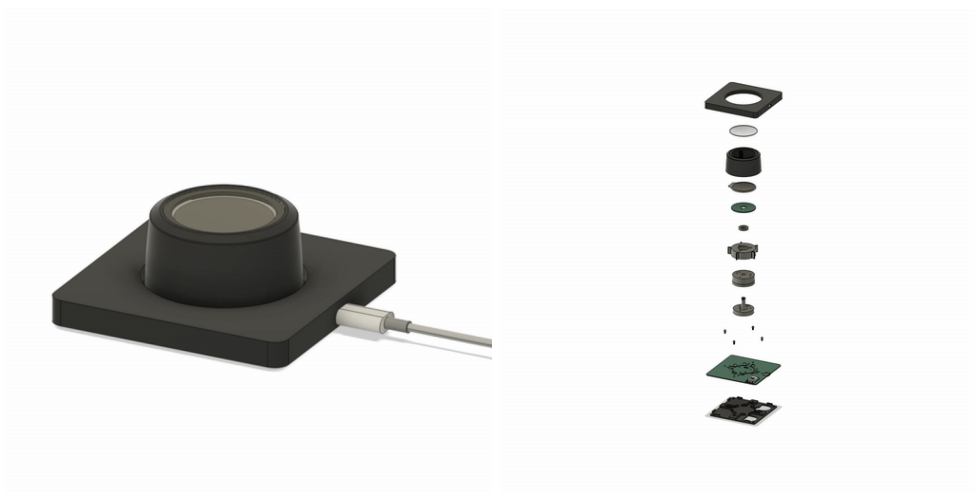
CAD model of assembled and disassembled states respectively[11].
